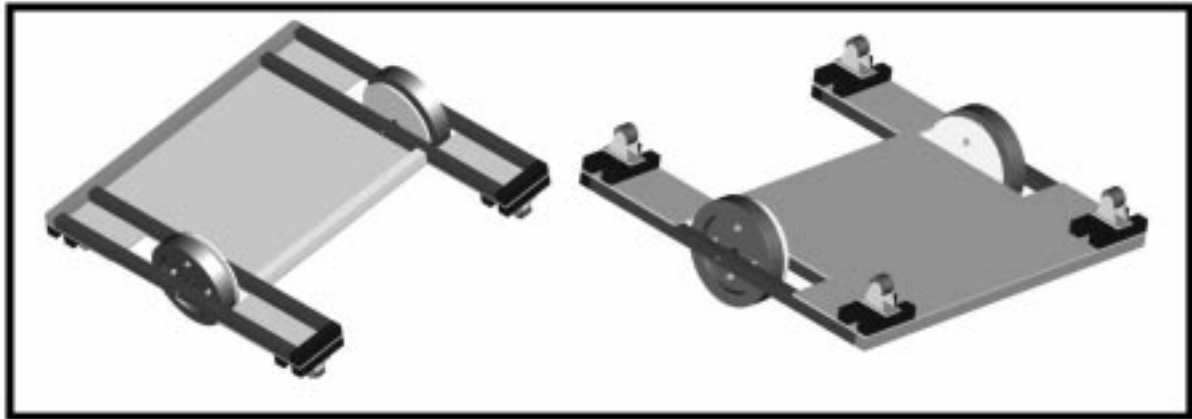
CAD drawings, typical of files that should be stored in the project file depository.
